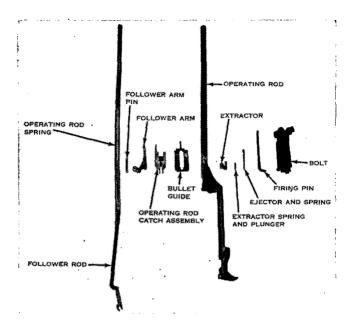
Parts of the barrel and receiver group in their order of disassembly.
